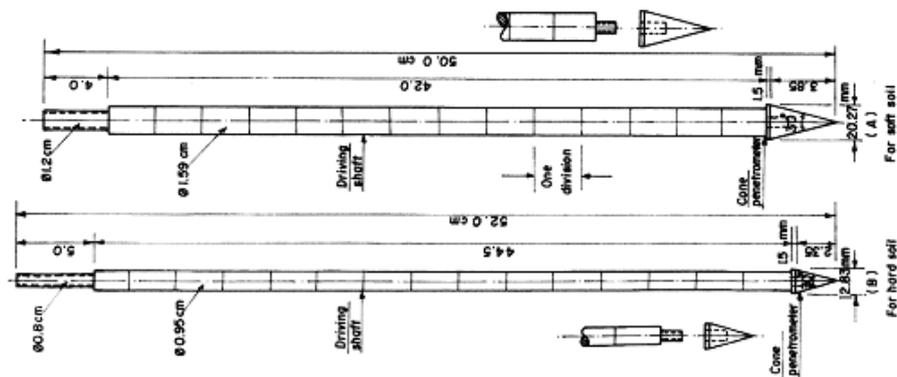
Details of the used steel shafts with its end cone tip used in the developed penetrometer.
